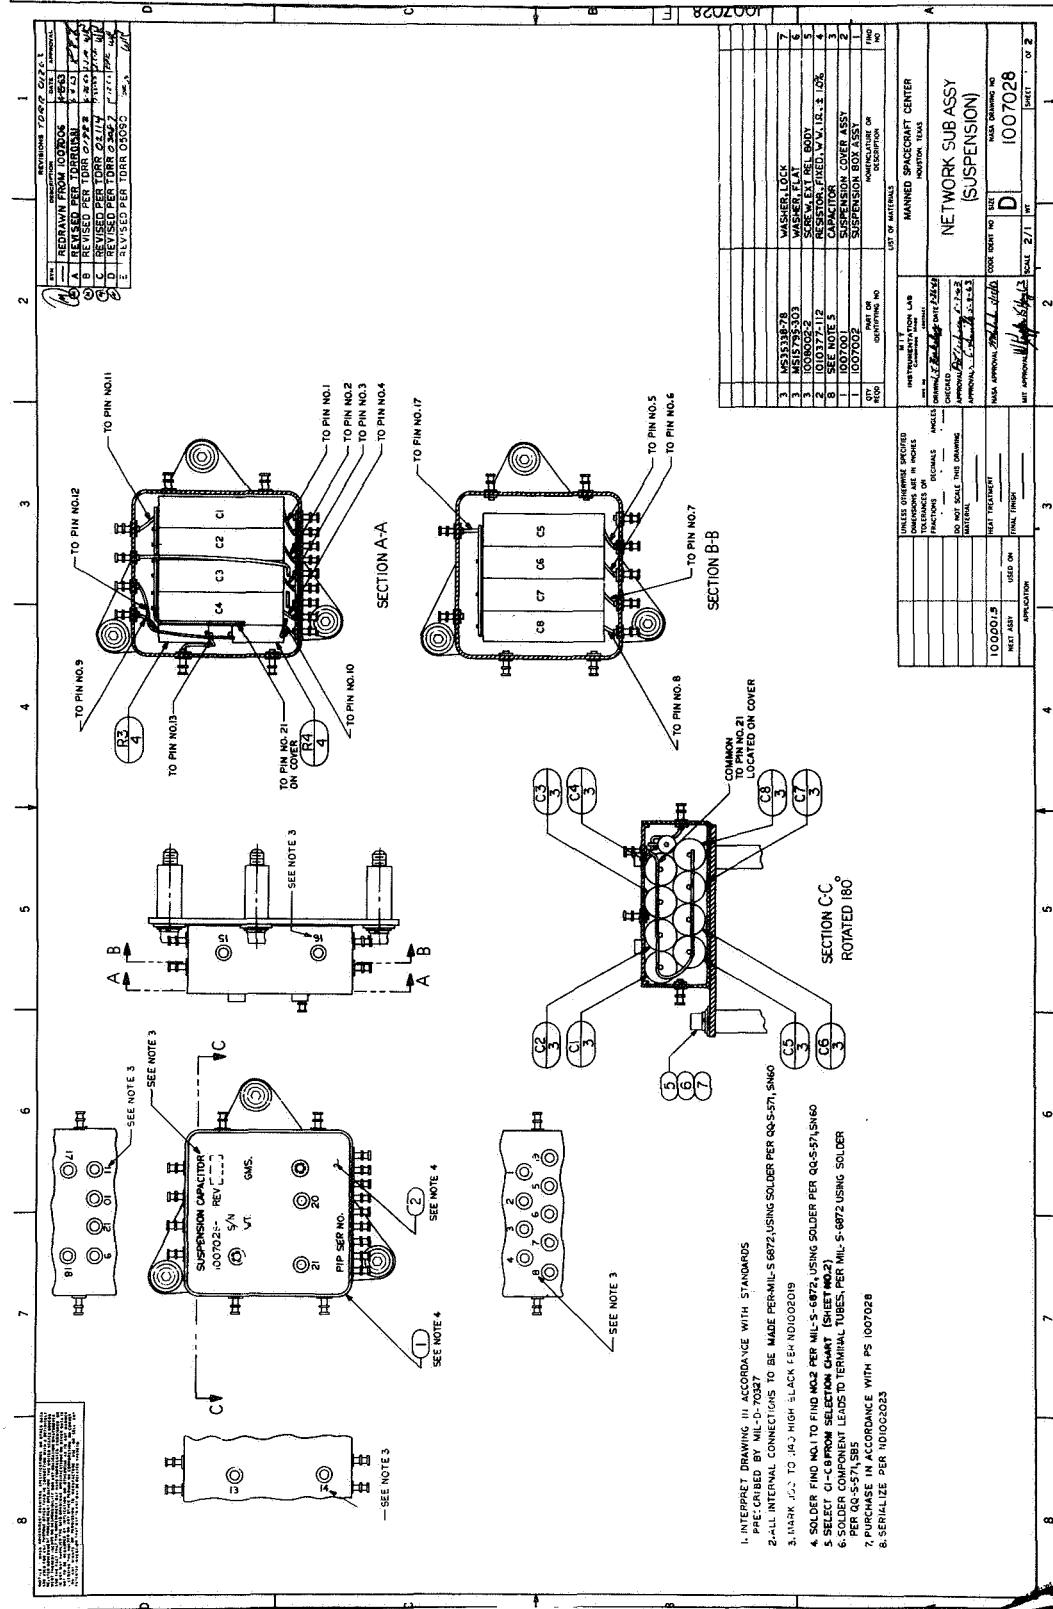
Sample Subassembly Drawing (Sheet 1 of 2).
